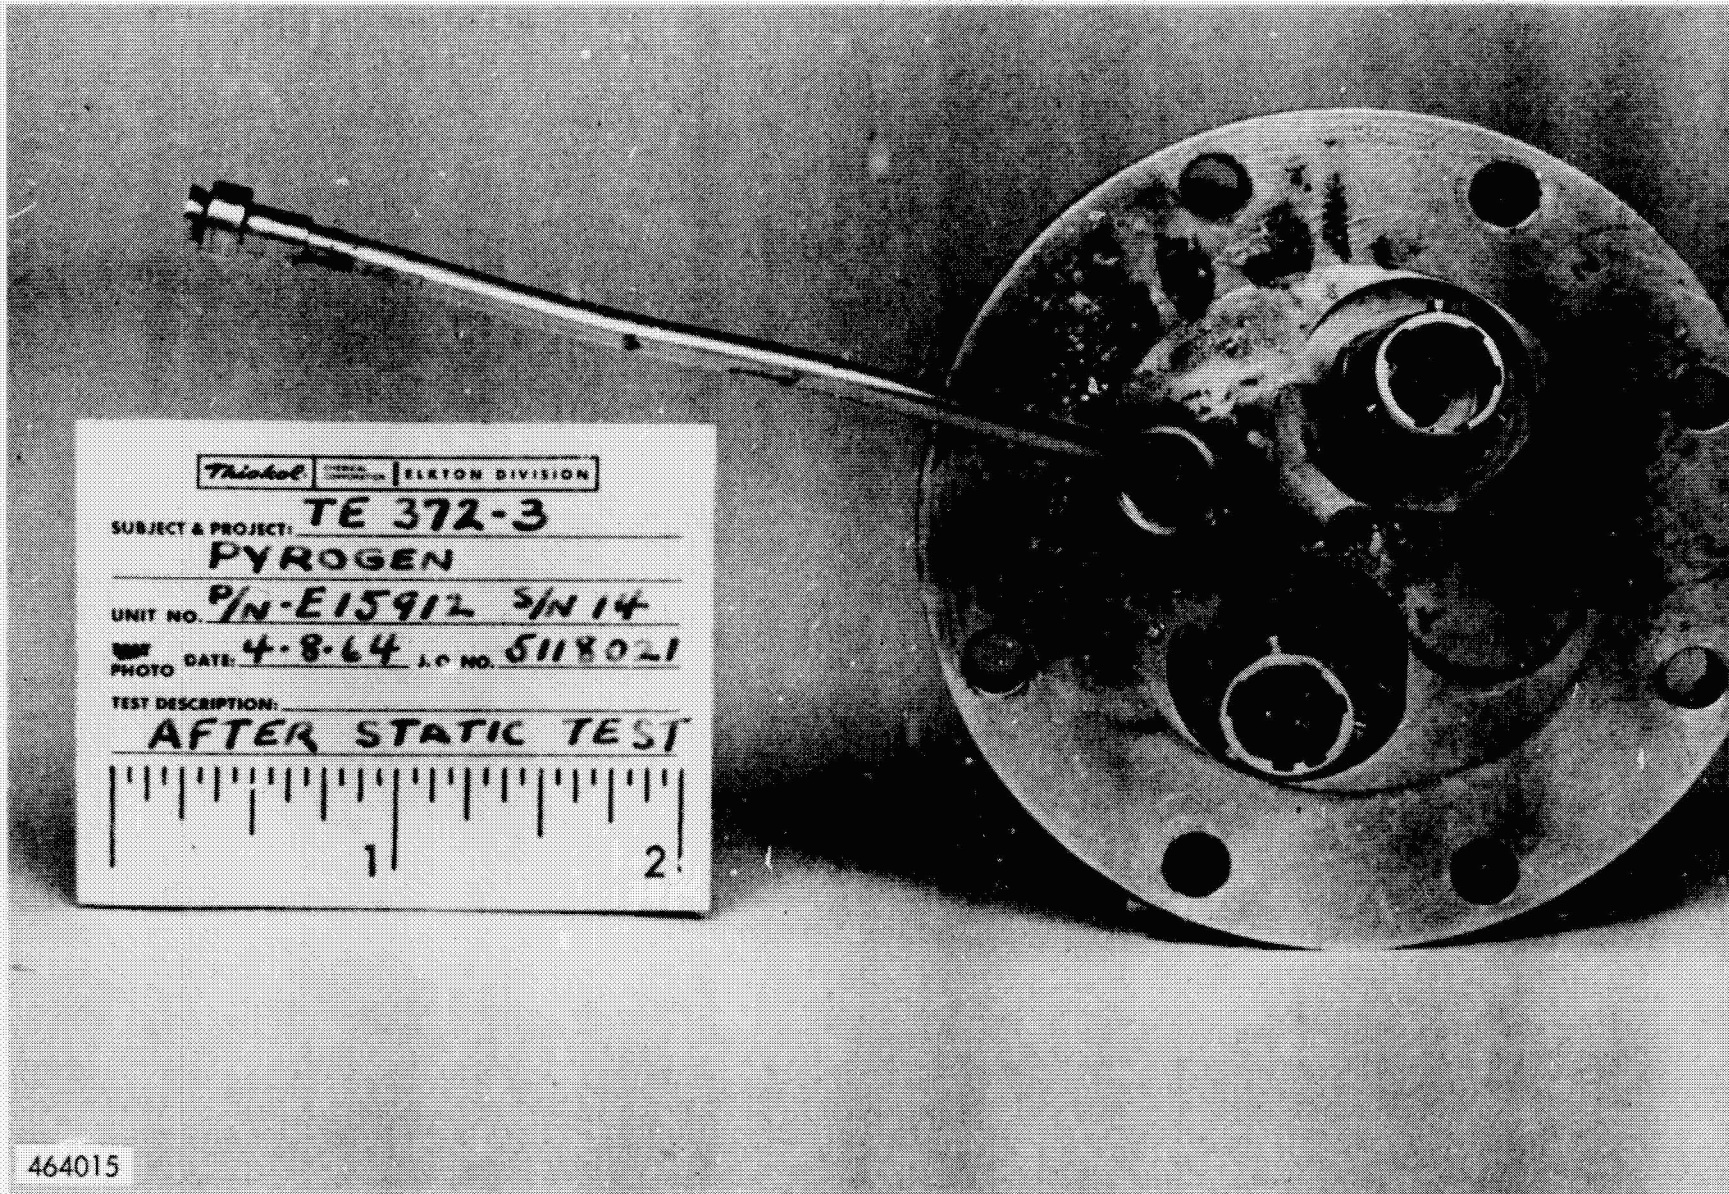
TE 372-3 PYROGEN HEADCAP ASSEMBLY
